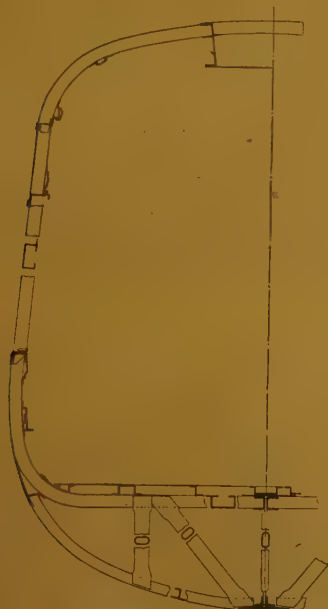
Cross-section of framing, showing various extruded sections used for the structural members.
